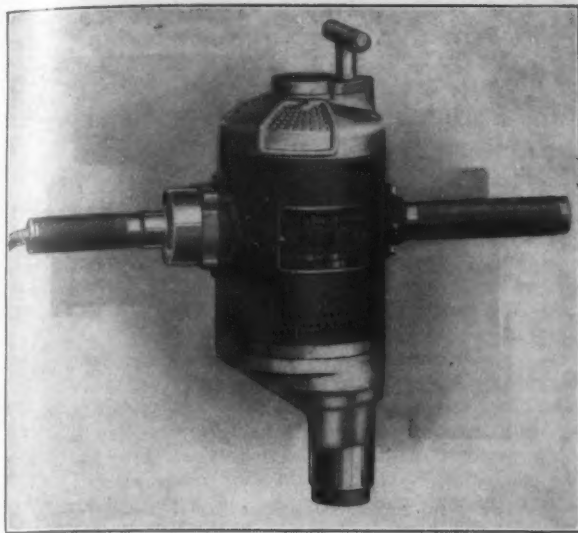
A Portable Direct Current Tool for Drilling $\frac{1}{4}$ -In. Holes in Steel.
